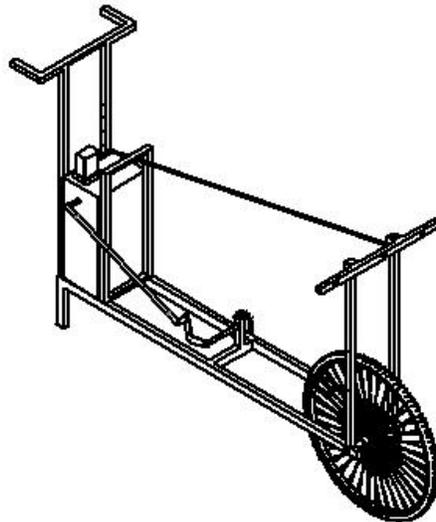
Assembly Drawing of the Chemical Spray Trolley
